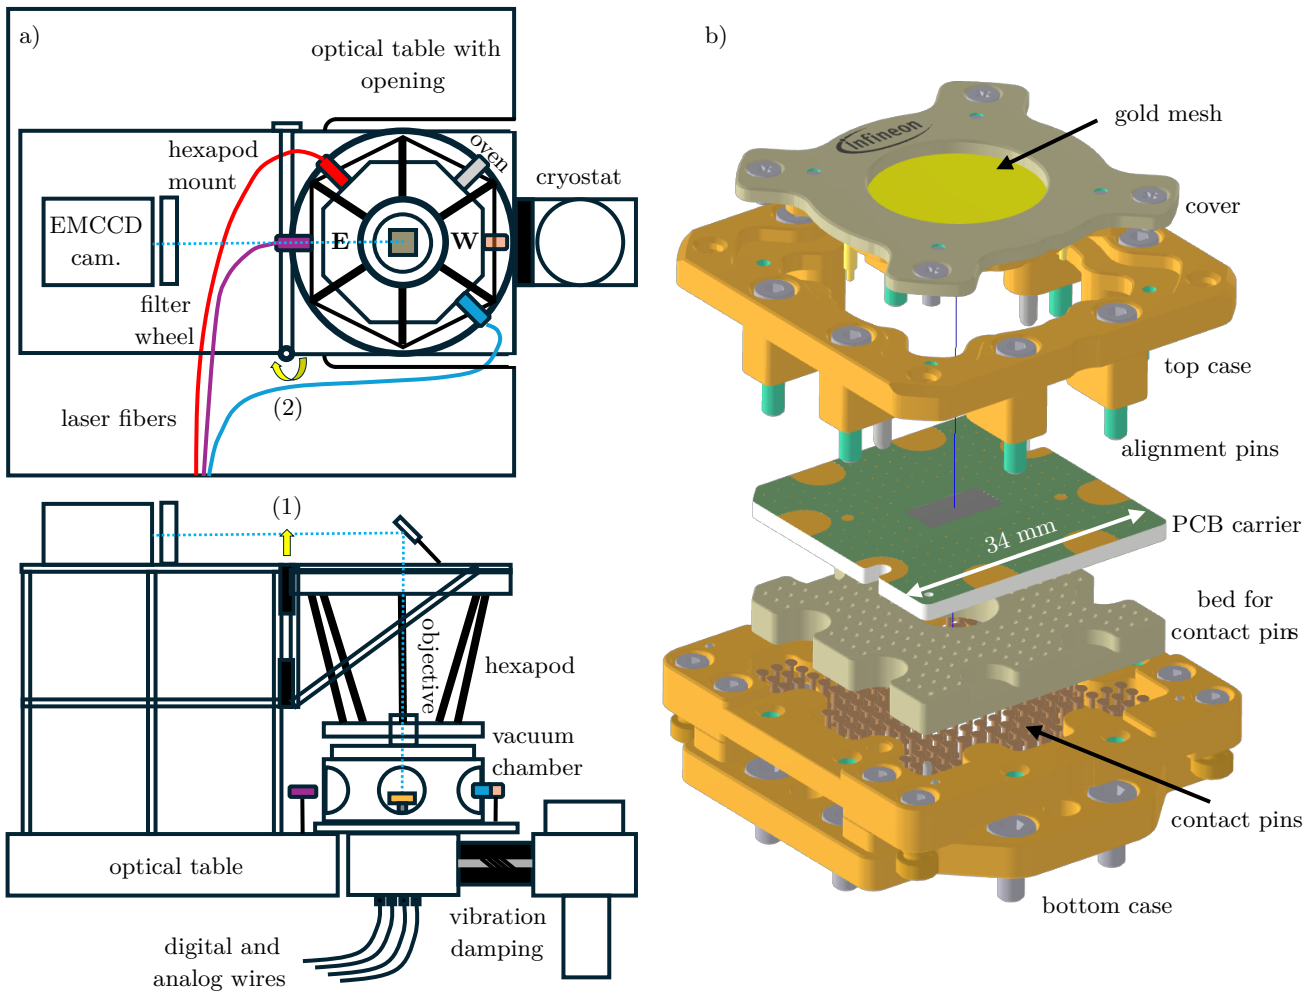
Experimental setup and socket. a) Sketch of an optical table supporting a vacuum chamber, an EMCCD camera, a hexapod holding an optical objective. Yellow arrows indicate the movable range of the hexapod. b) Exploded view of the socket with a bottom case containing recessed beds for contact pins, which are inserted to provide electrical connections to a PCB carrier. The top case uses alignment pins for precise assembly, and a cover incorporates a gold mesh electrically connected via the PCB carrier.
